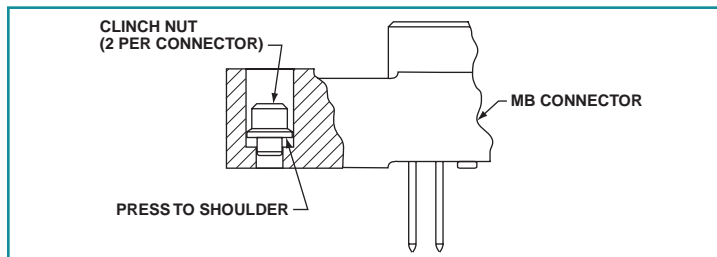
MB CONNECTOR WITH CLINCH NUT MOUNTING
